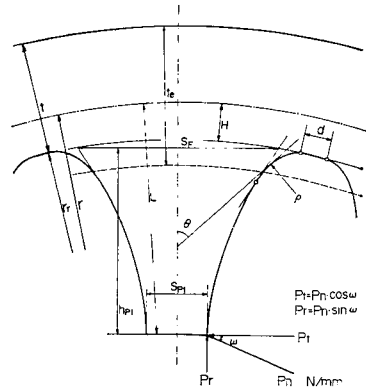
Notations to show dimensions of tooth and rim of internal gear and a loading condition for calculating tooth fillet and root stresses of internal gear
